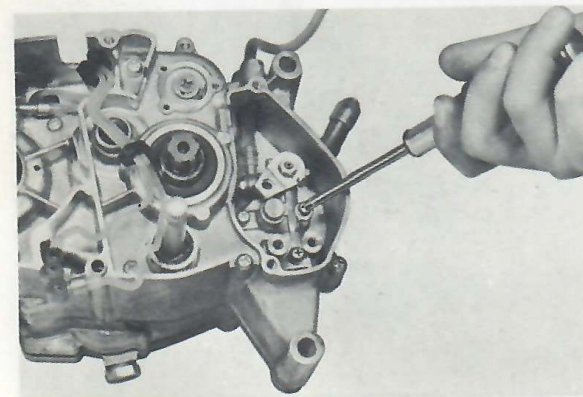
Loosening oil pump fitting screws with cross head screw driver
